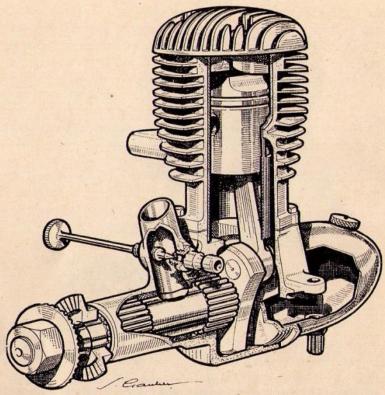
The French "Morin" design has a piston deflector with recessed head. Note the roller main bearings.
